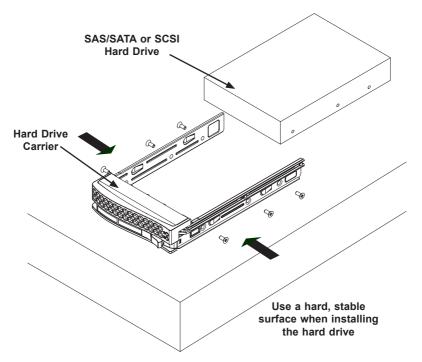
Installing a SAS or SATA Drive to Hard Drive Carrier
